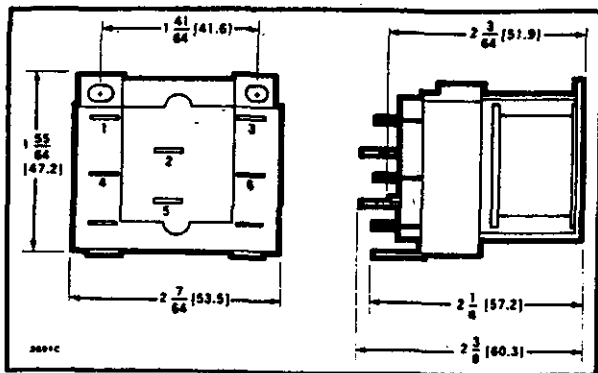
RELAY DIMENSIONS IN in. [mm IN BRACKETS].
